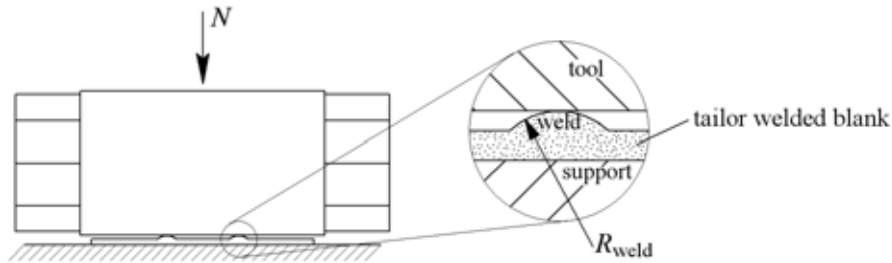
Contact between tool and tailor welded blank in the experiments.
